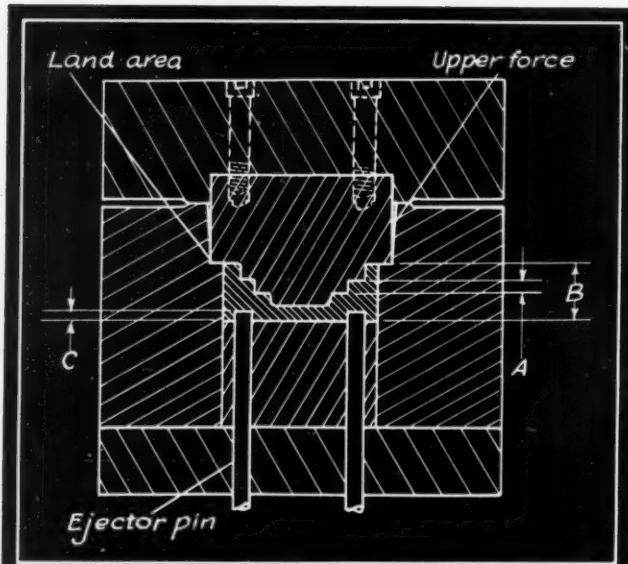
In this semipositive mold, dimension A will be accurate because it is developed along the same mold component. Other dimensions may vary considerably
